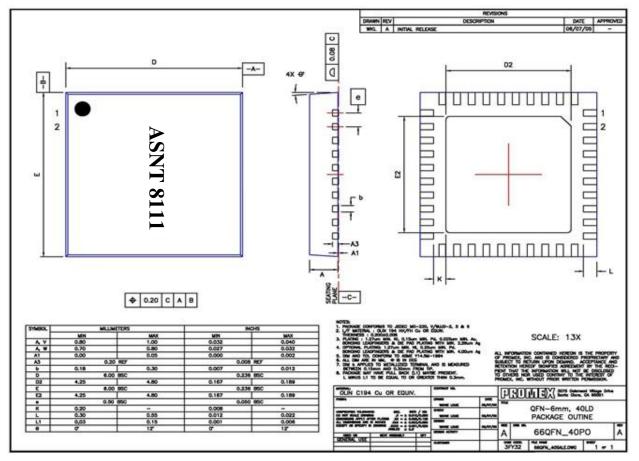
QFN 40-Pin Package Drawing (All Dimensions in mm)
